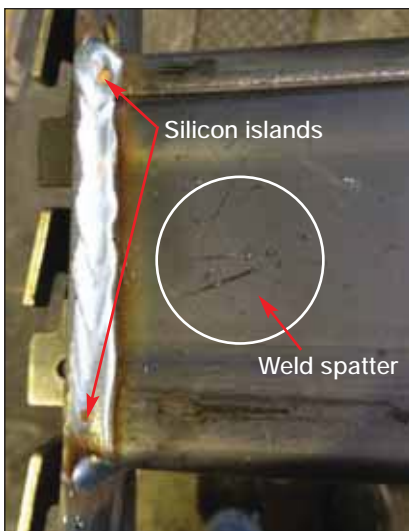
A quality weld with unavoidable weld spatter.
